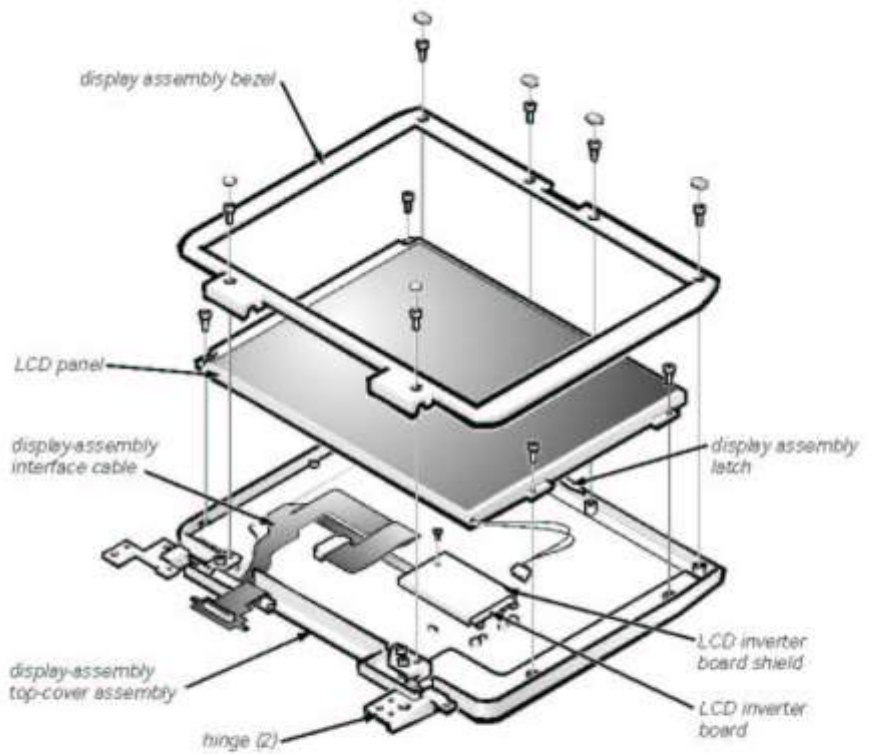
Exploded View—Display Assembly (13.3-Inch Display Shown)
